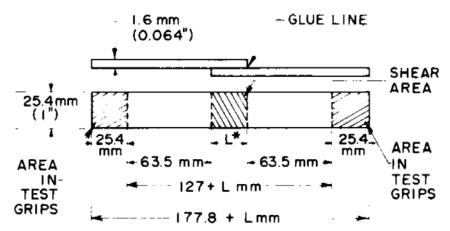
Form and dimensions of Shear Strength of single-lap-joint test specimens [10]
